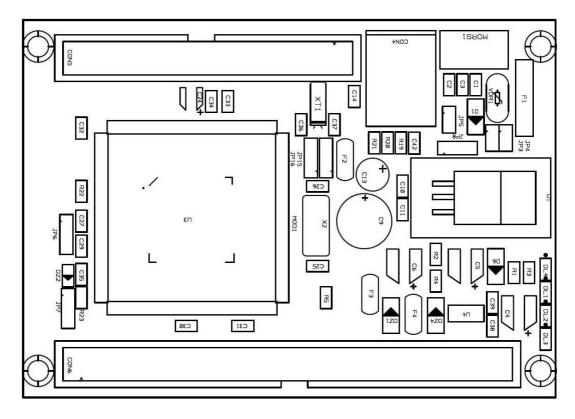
[FLEX001] Details of FLEX Light Base Board
